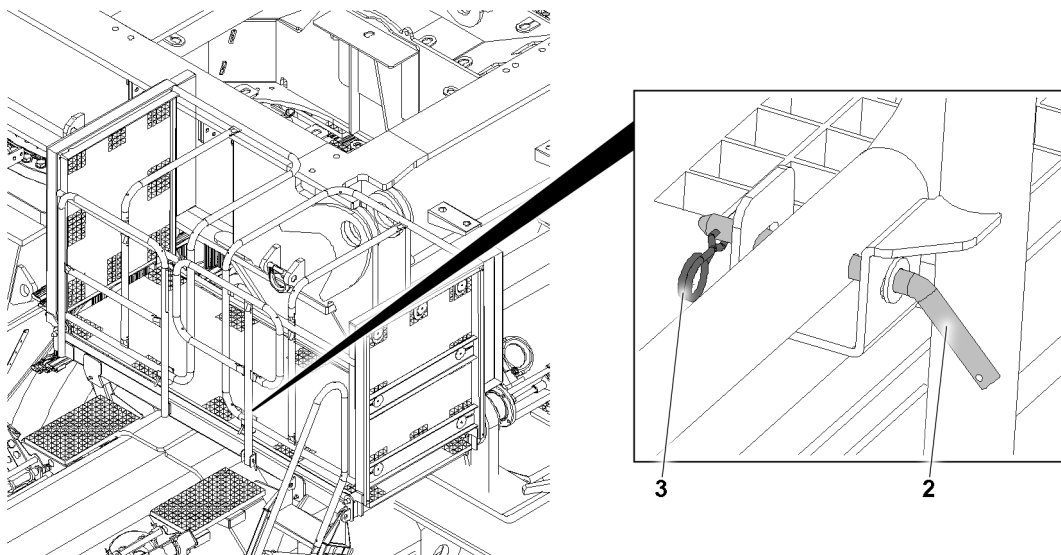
Assembling the platform in the operating position — unpinning the platform
